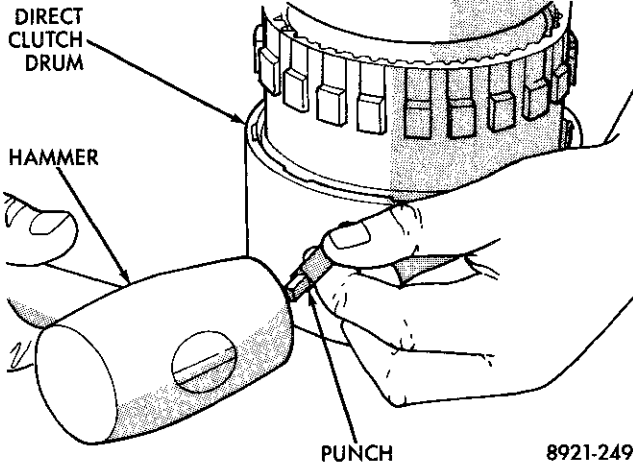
Marking Direct Clutch Drum And Annulus Gear For Assembly Alignment
